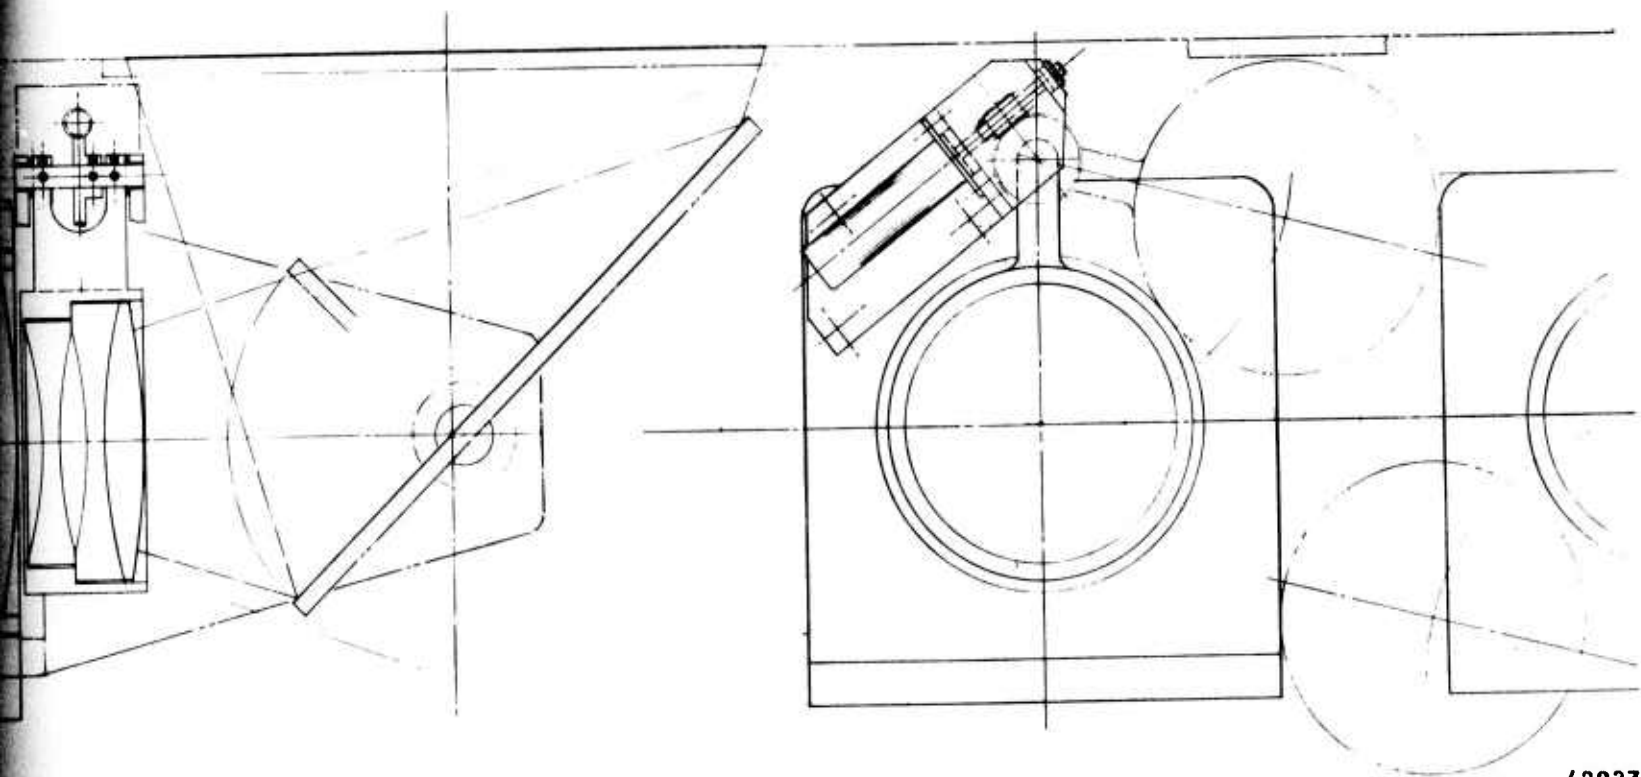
2X Adapter Lens Mechanism Layout (Drawing #721518)
